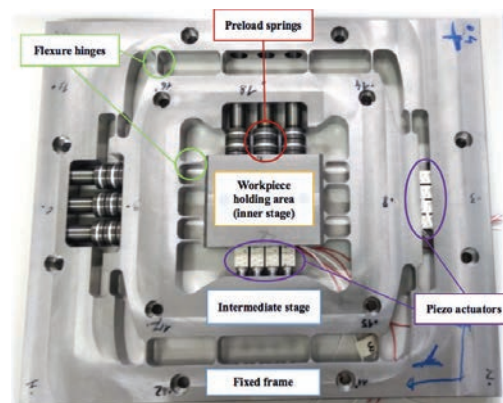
Active fixture prototype (external dimensions 343x289x20mm).
